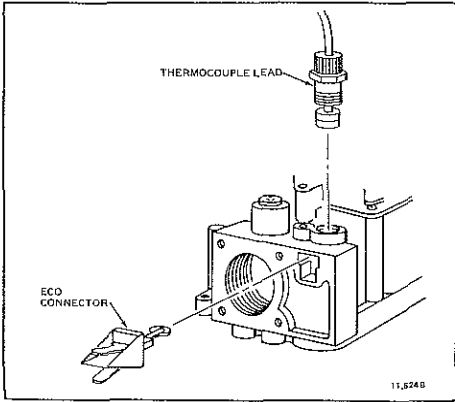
Install ECO connector into gas control at thermocouple terminal location.
